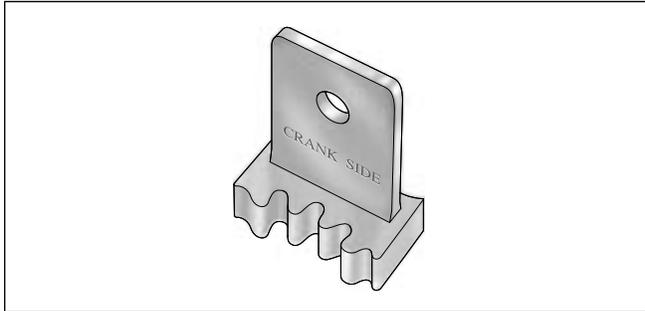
Crankshaft/Camshaft Sprocket Locking Tool (Part No. HD-42314)
